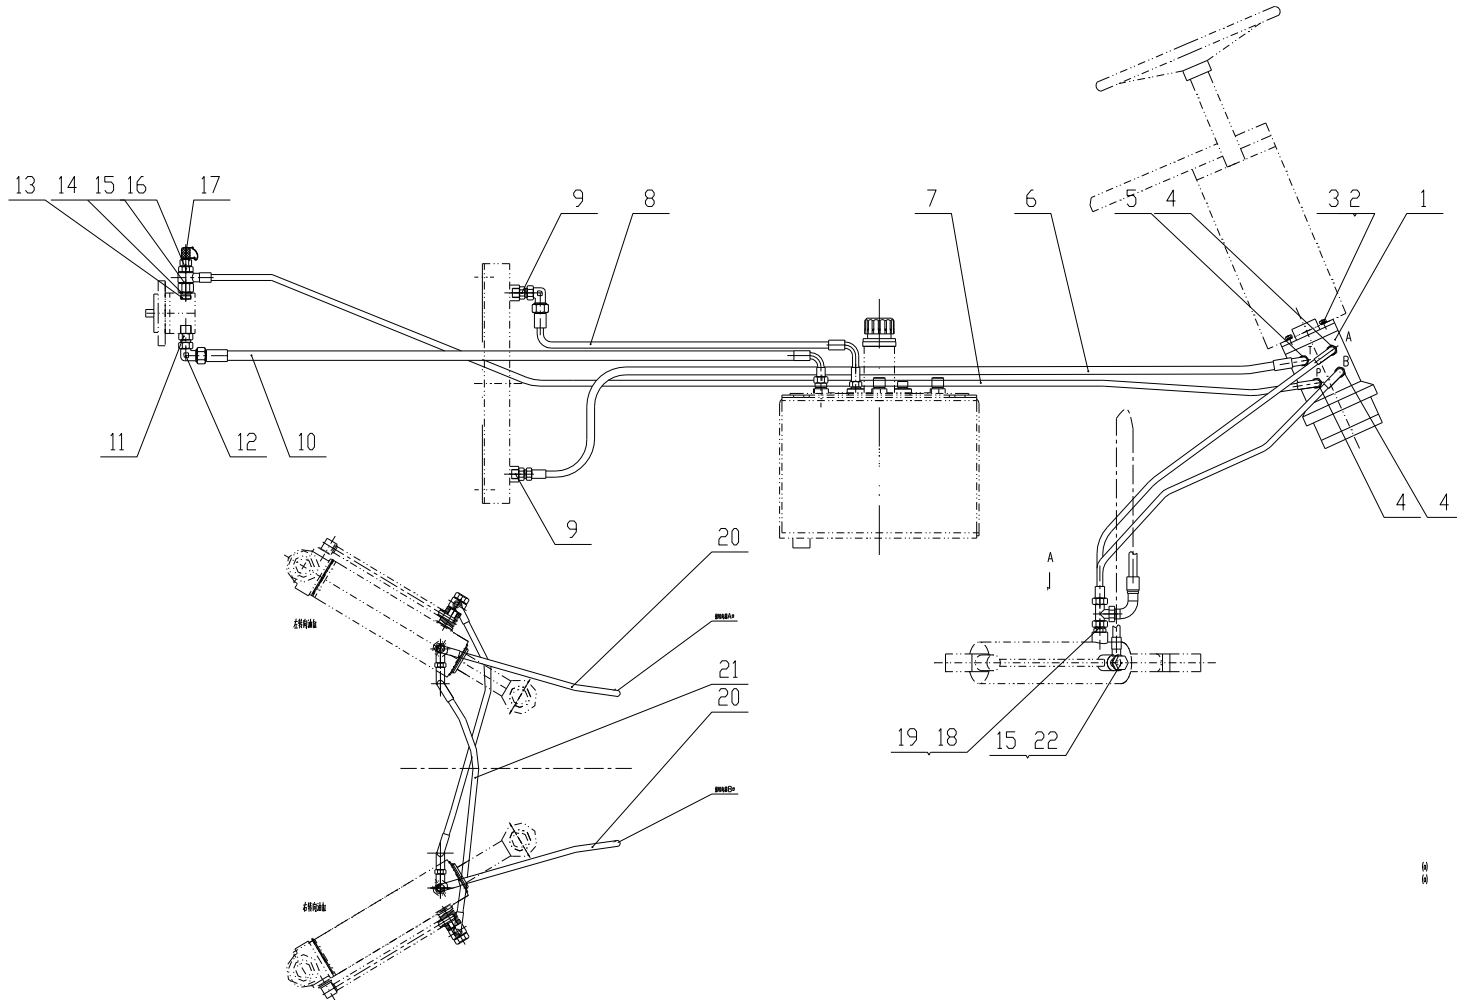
Hydraulic steering system 液压转向系统			Remarks
